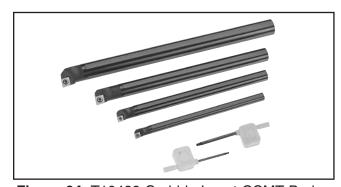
T10439 Carbide Insert CCMT Boring Bar Set.
